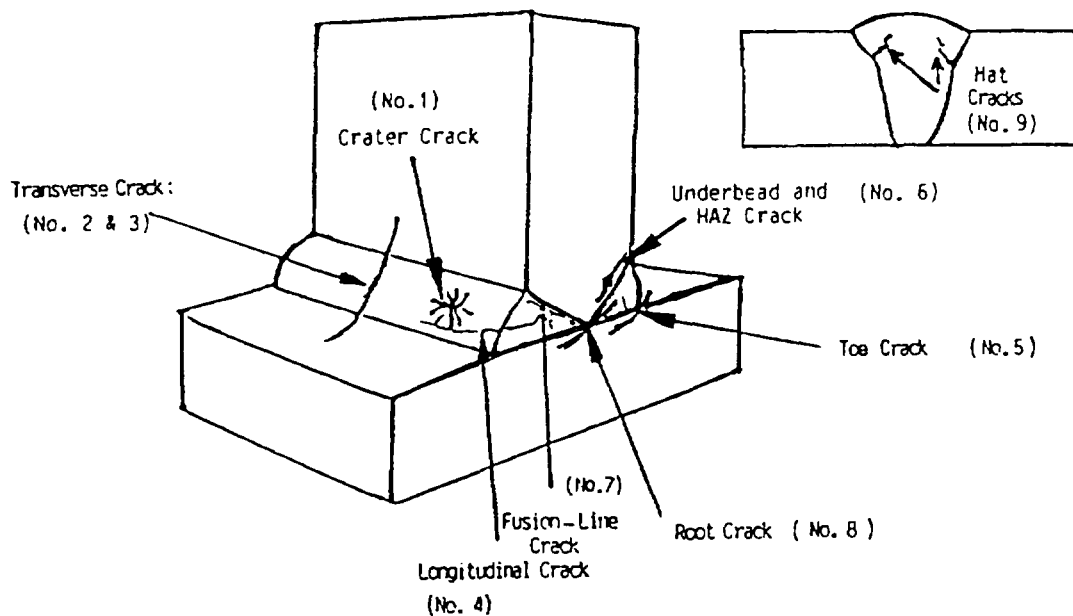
Different types of cracks located in and around a welded joint.
